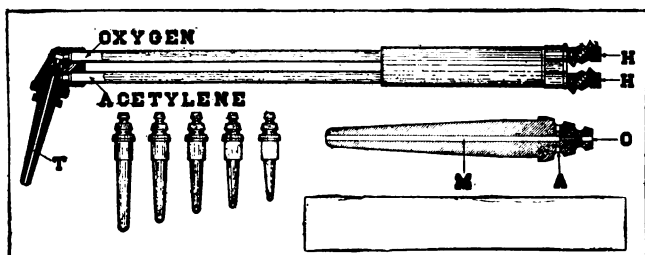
OXY-ACETYLENE WELDING TORCH AND TIPS
